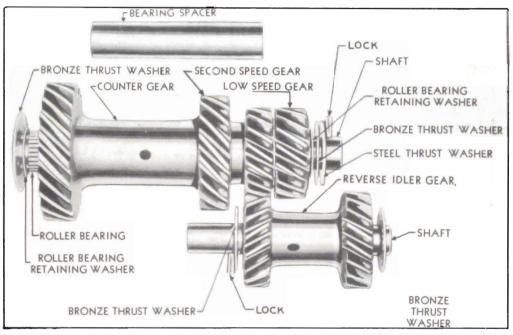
Counter Gear and Reverse Idler Gear—1948 Series 70
